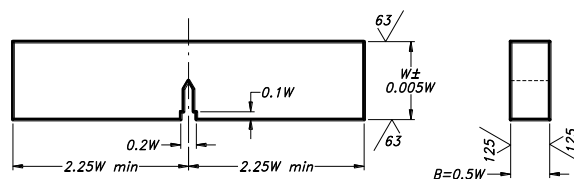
Geometry of 3PB specimen used for Fracture mechanics tests.
